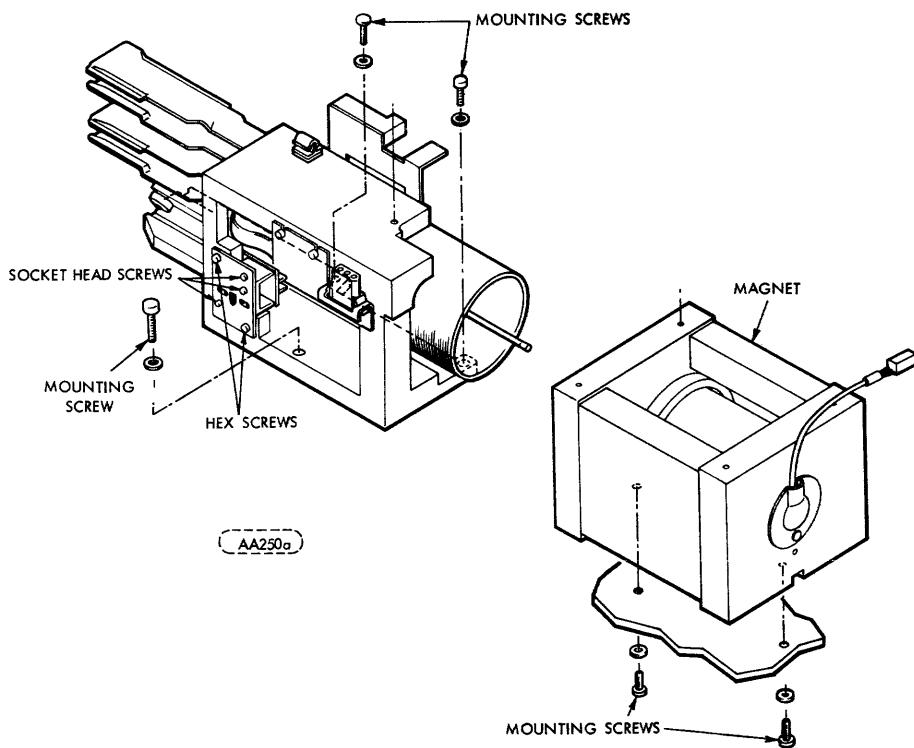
ACTUATOR, MAGNET AND EOT MOUNTING
